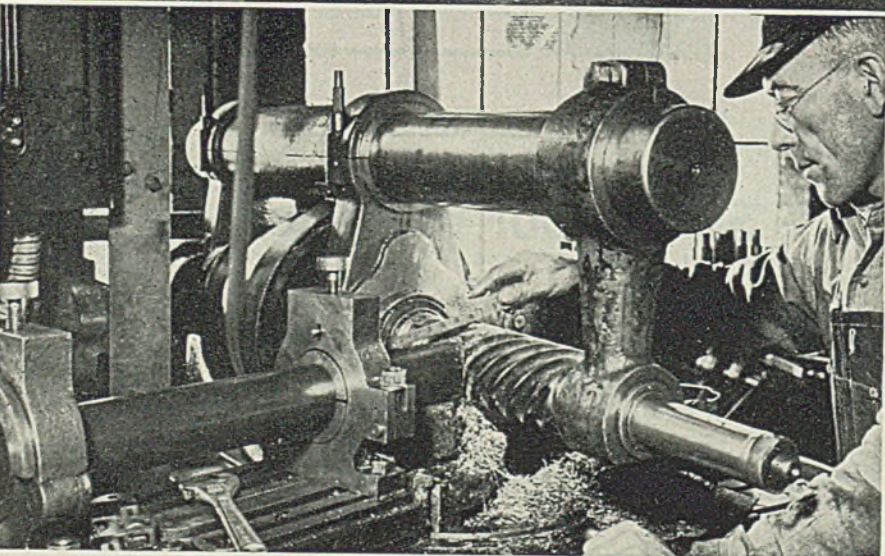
(Lower left)—Profiles of fitted joints are milled to insure accurate fitup. Use of sphere joints permits most tube ends to be cut square, thus simplifying preparation of joints
